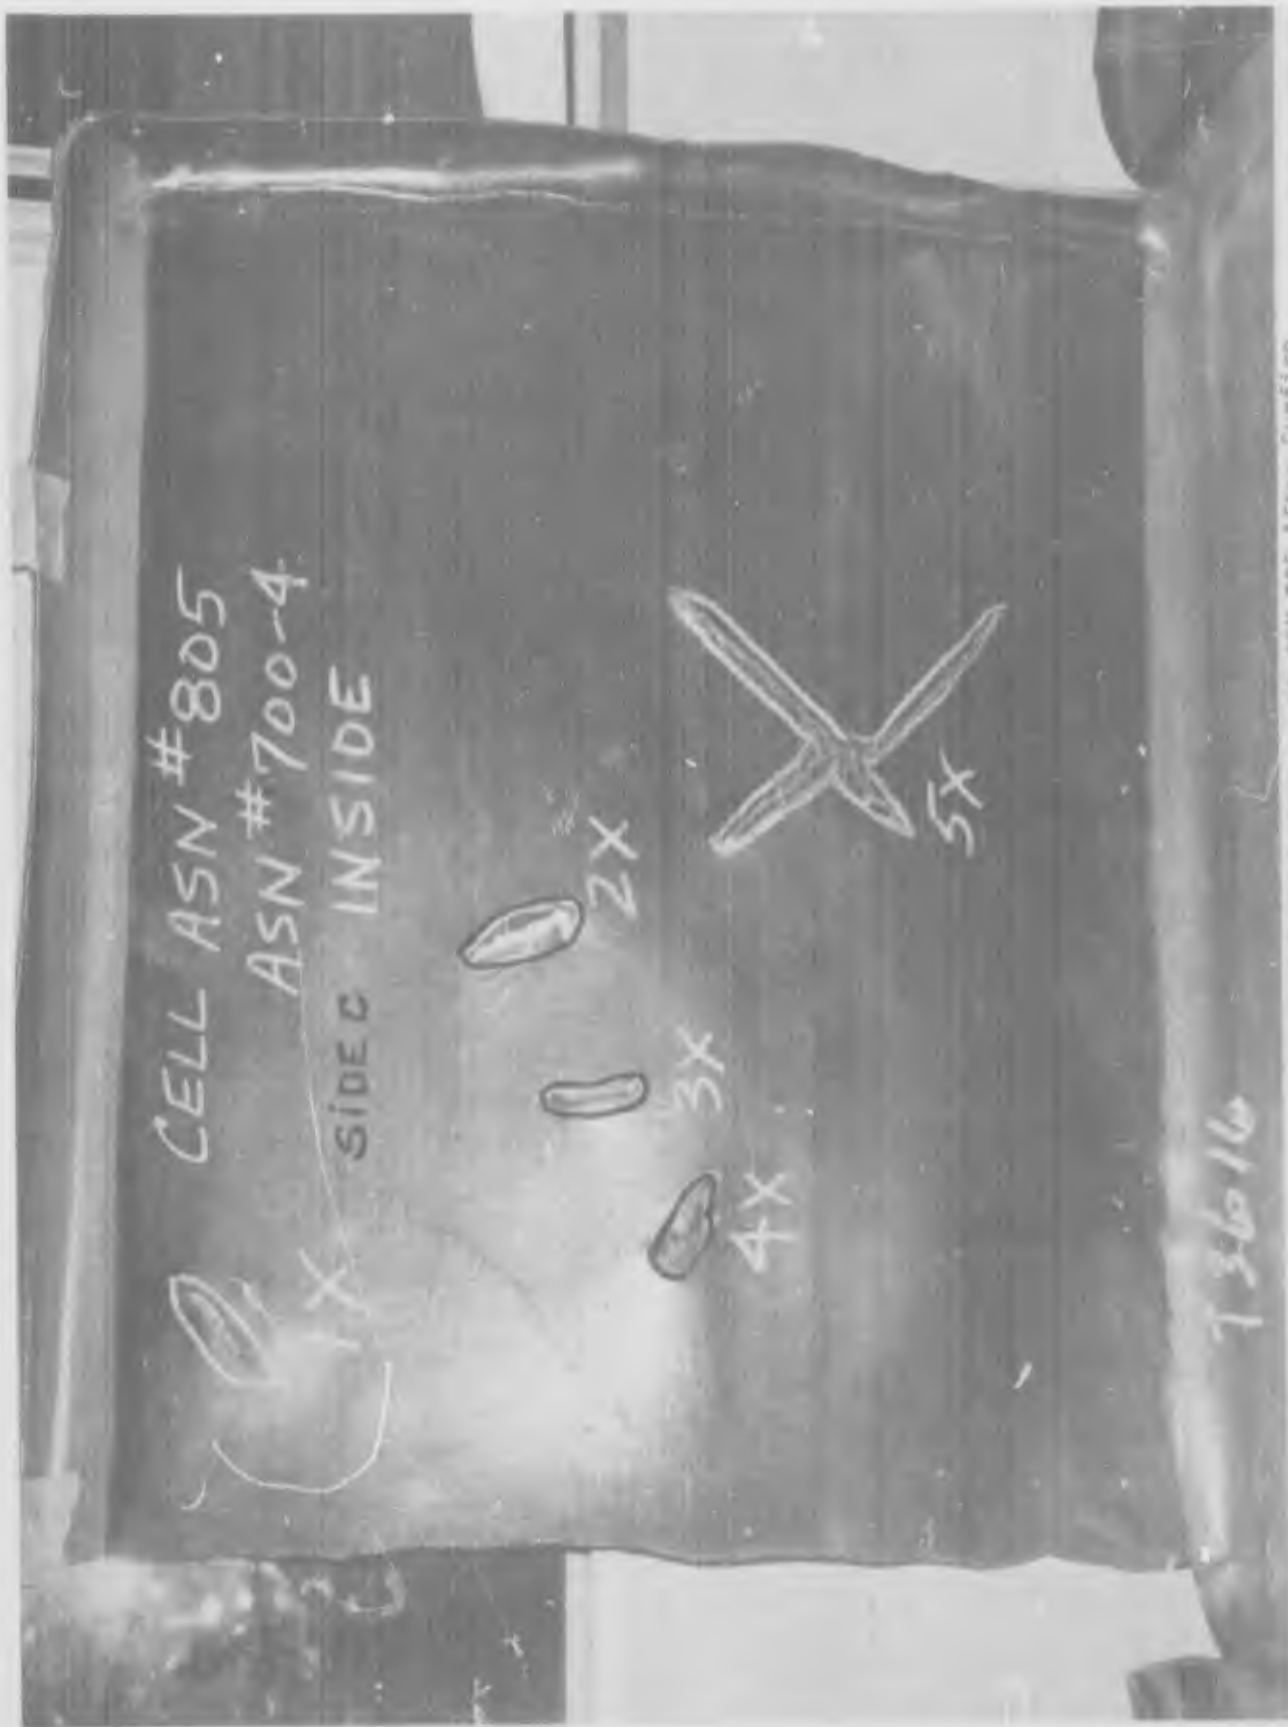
Inside of Side C of Test Cell ASN 805 After Gunfire
